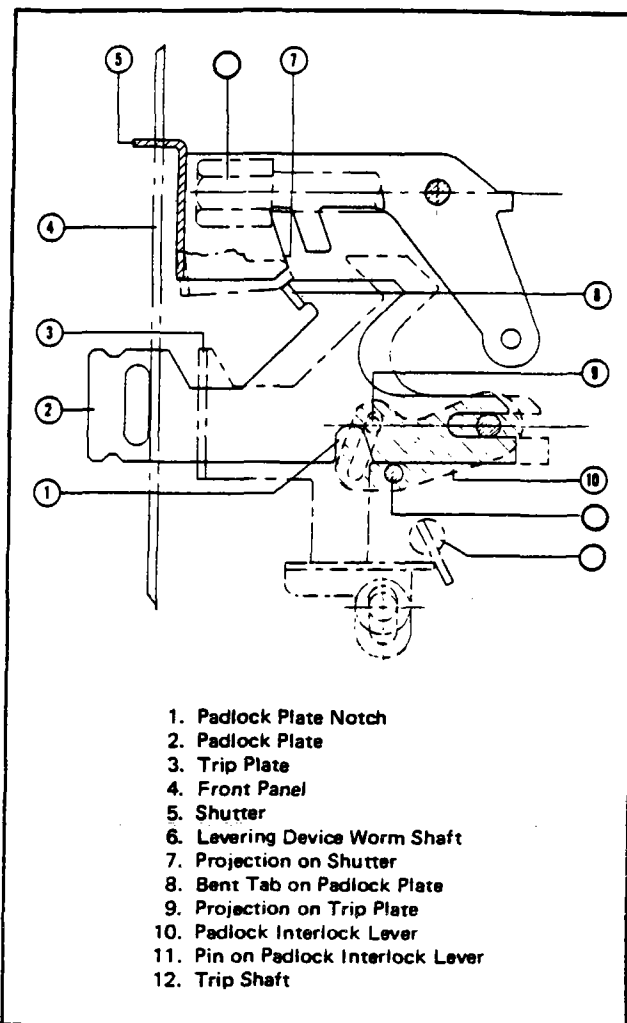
Padlock Device - Locked Trip Free and Shutter Raised
